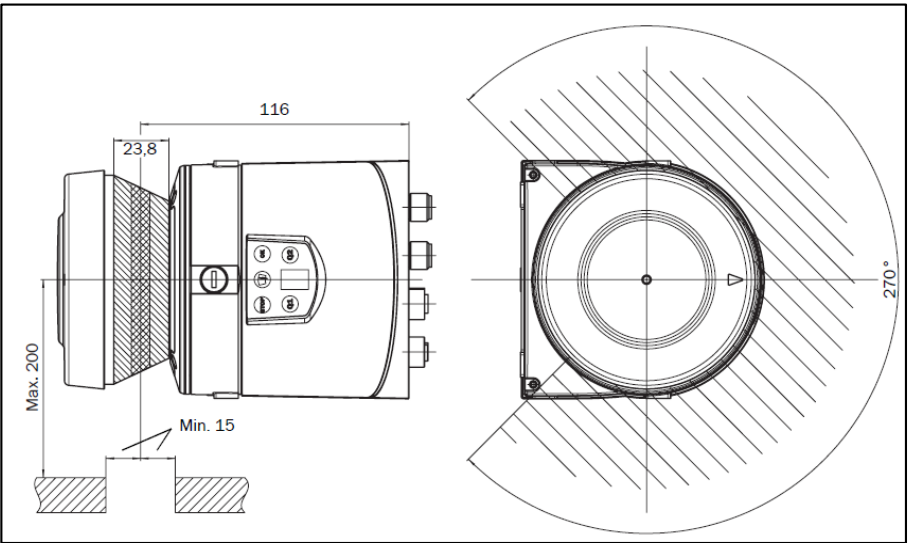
Dimensional drawing of the LMS111 laser scanner
